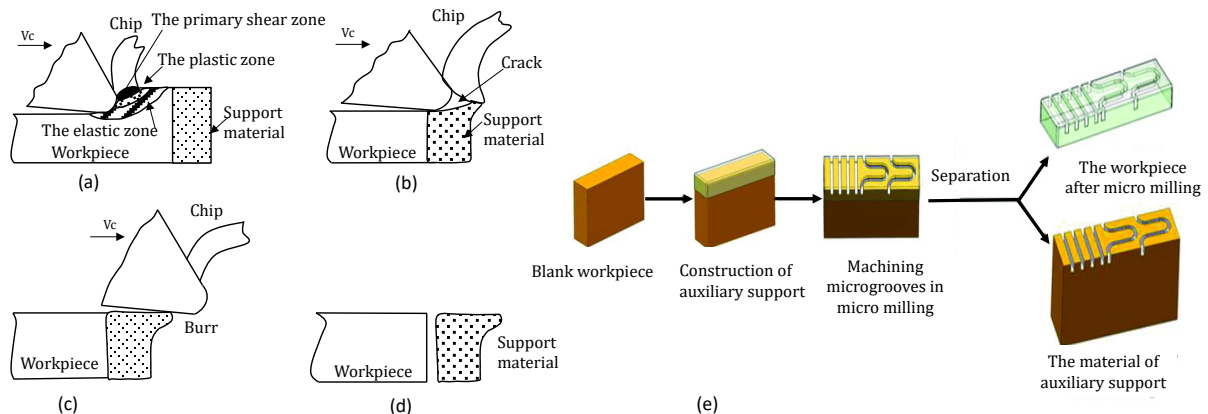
Burrs control mechanism in micromilling. (a) Extending workpiece boundaries with supporting material. (b) The crack grows on the support material. (c) Burrs formation on the support material. (e) The process of burr control(Ref 63)
